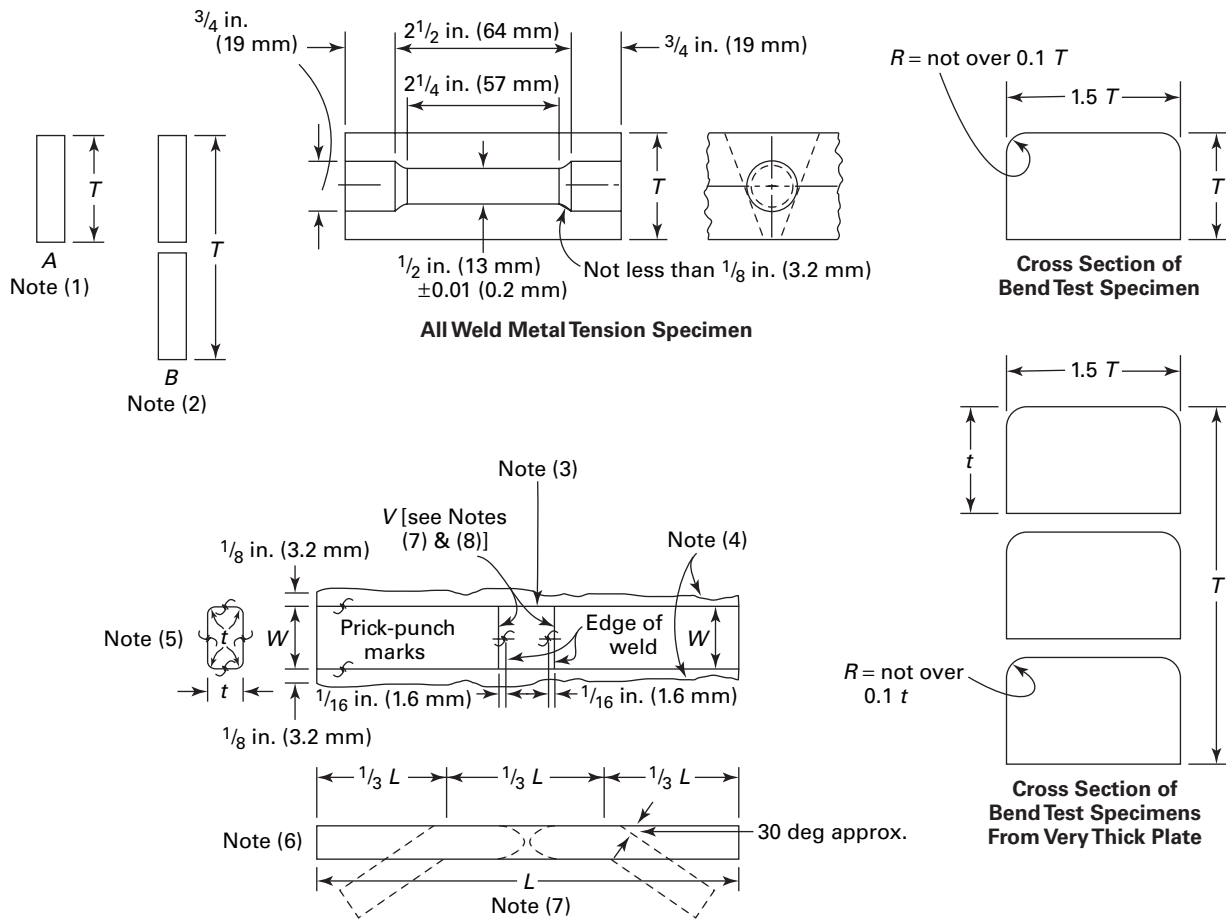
DETAILS OF TEST SPECIMENS
